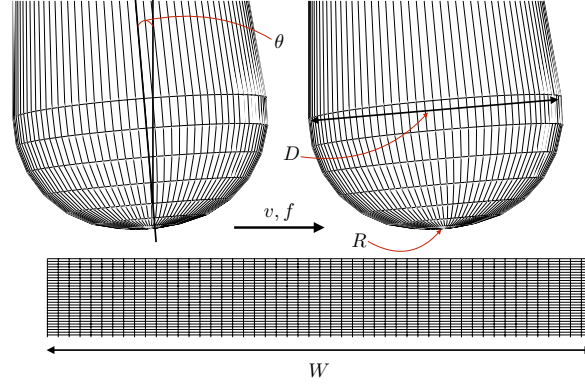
Schematic showing the hammer's geometry and movement (thick arrow) along the weld toe
